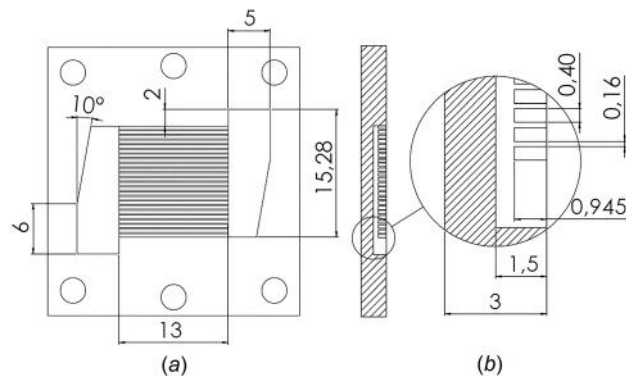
Technical drawings of the proposed micro heat exchanger: (a) open view of the bottom plate and (b) channel details and dimensions
